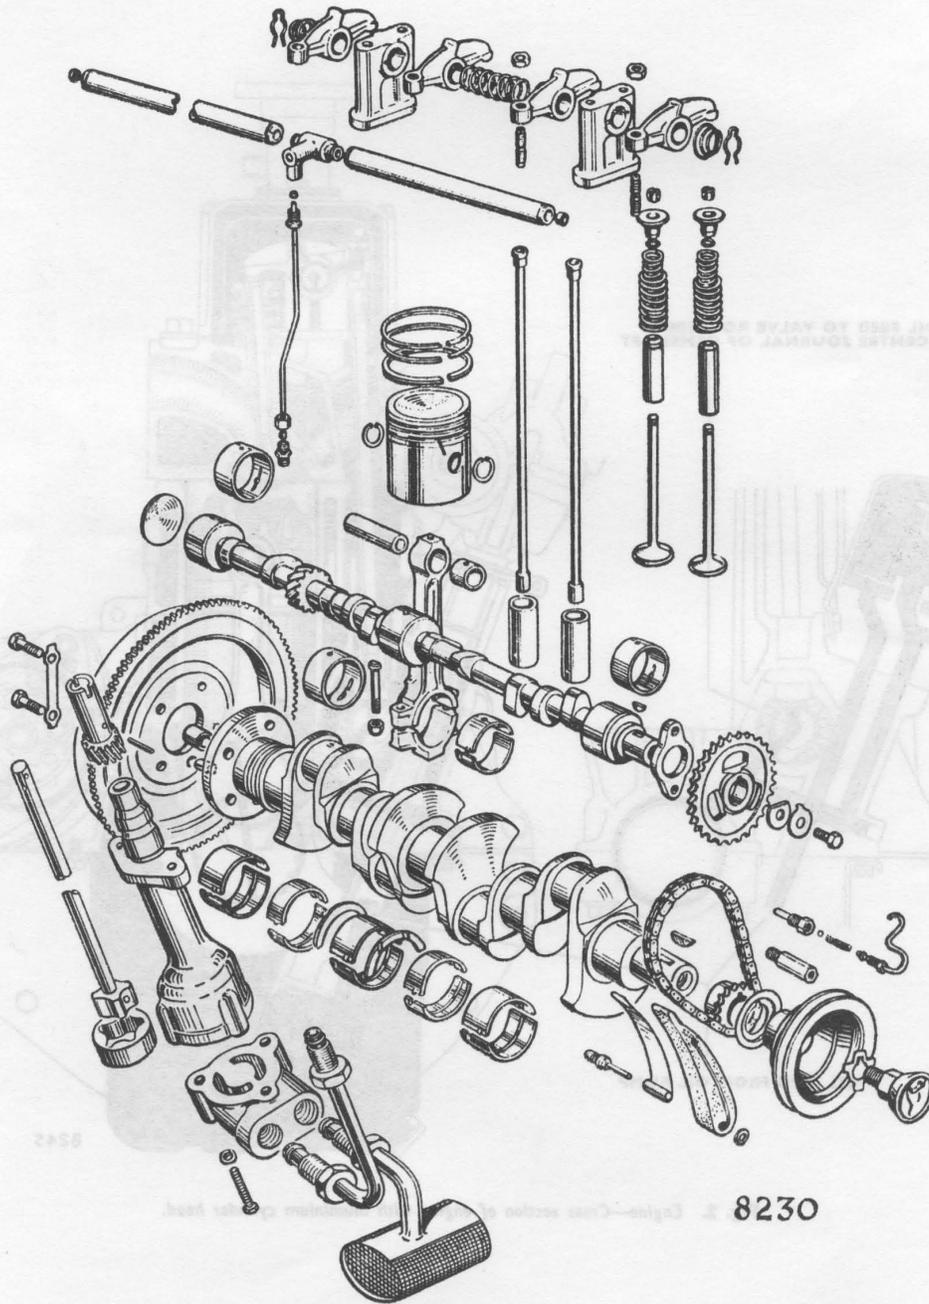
Exploded view of working parts—engines with cast-iron cylinder heads.
